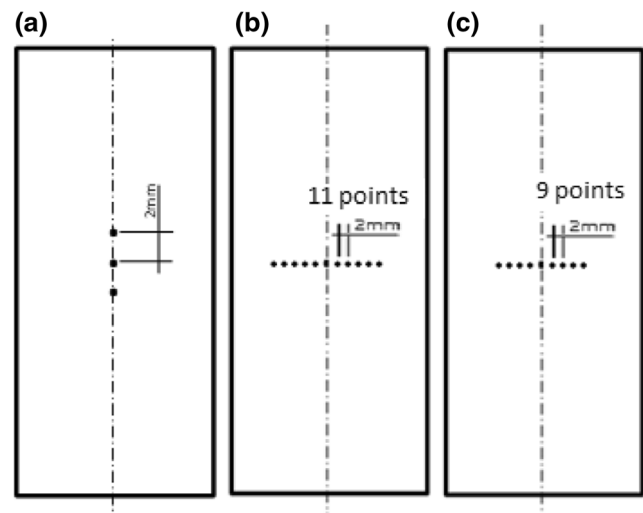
Microhardness measurement points. a weld line, b cross-sectional profile on aluminum surface, and c cross-sectional profile of titanium surface. Source: author
